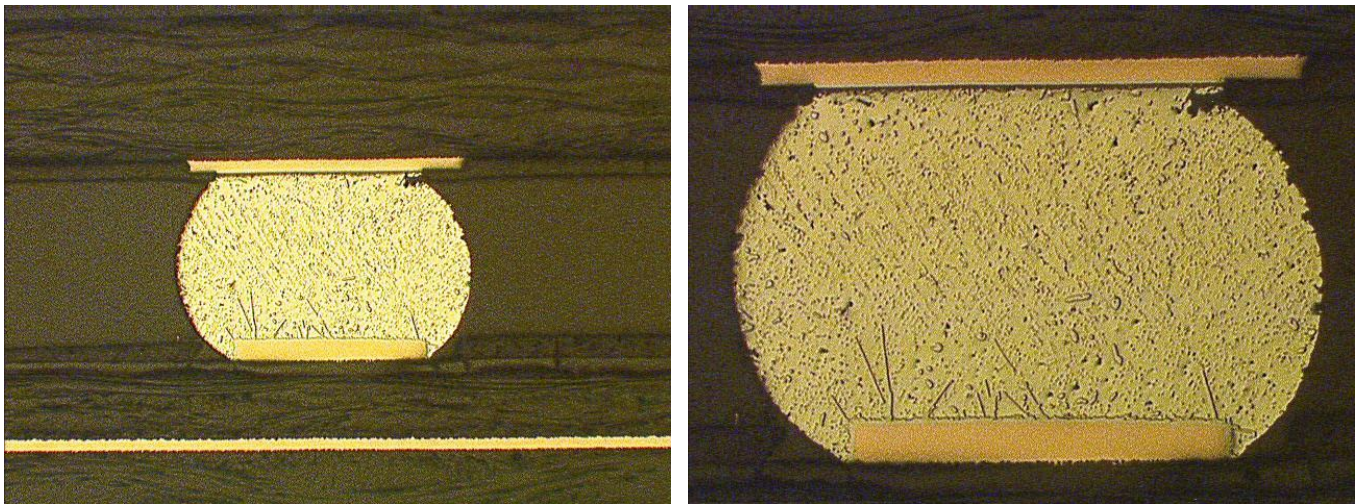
Reworked PBGA-225 Solder Joints, Board 164, Component U18, Initially SAC305/SAC405, 1 rework SnPb/SAC405, DNF
